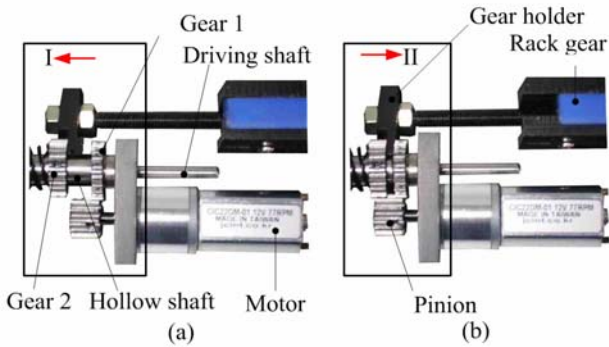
Motions of auxiliary wheel mechanism; (a) driving mode, and (b) rough terrain mode.
